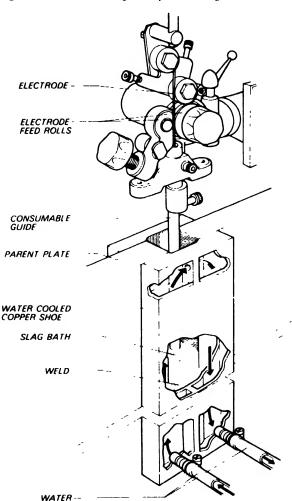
(a) Consumable guide layout showing water-cooled dams
